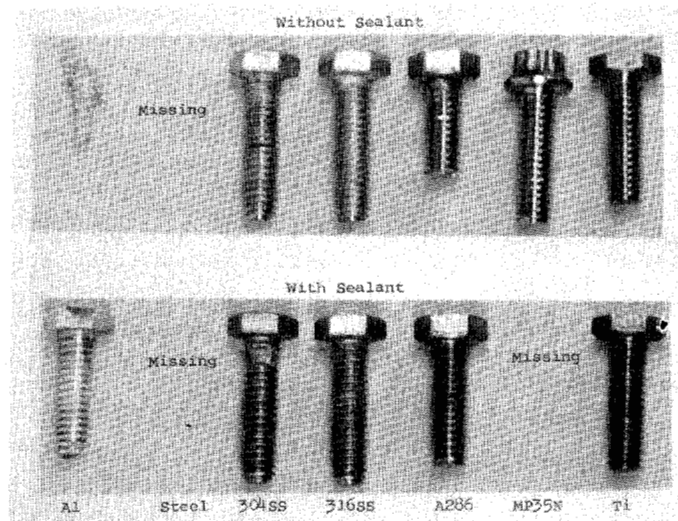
Corrosion attack of bolts in a 17-4PH stainless steel panel after 6 months' immersion in seawater
